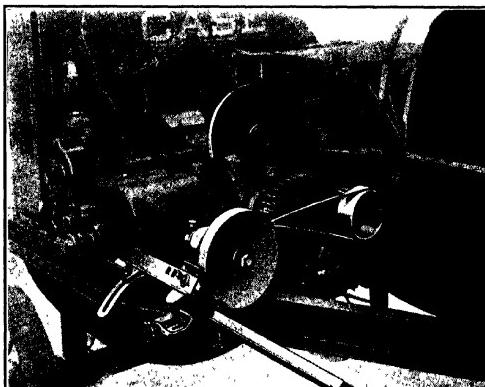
Knife-grinding attachments may be procured for most machines.
